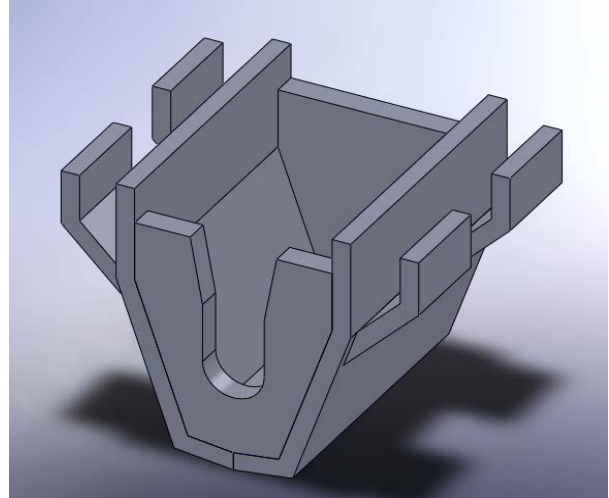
Computer Aided Design (CAD) Drawing of the V-Hull Assembly
